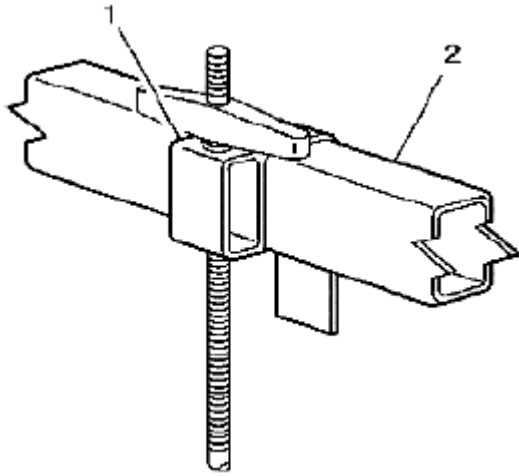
Identifying Bracket Assembly And Longitudinal Mounted Cross Bar
